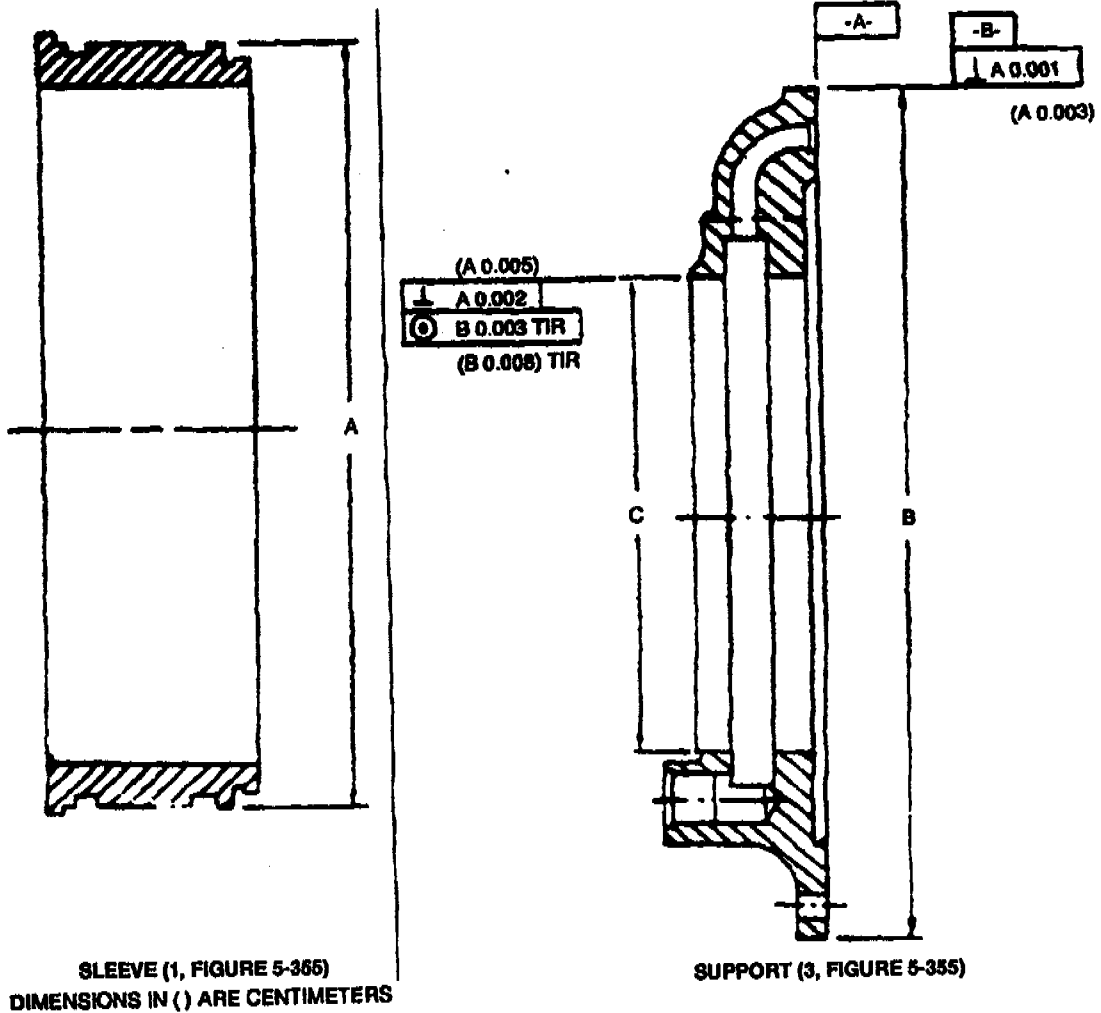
Oil Transfer Support Assembly Dimensional Inspection (T53-L-13B, -703).
